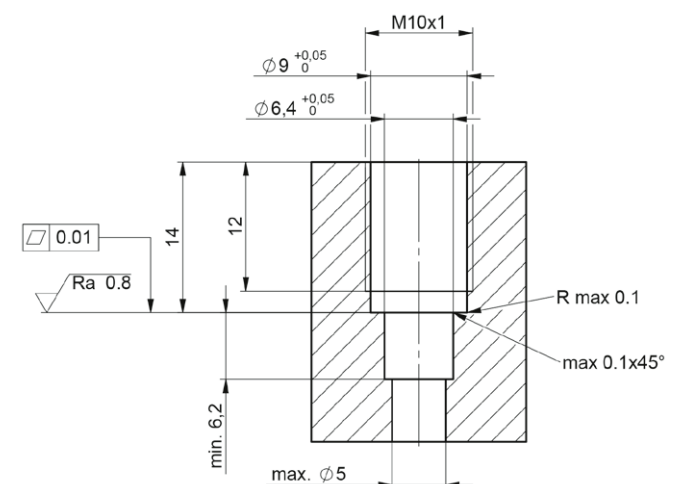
Mounting bore dimensions for recessed mounting of Type 6239AAA (M10x1 thread)
